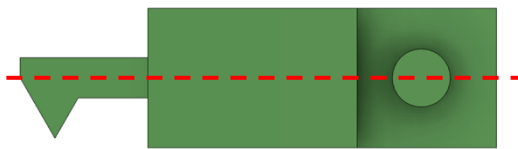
Updated Latch design showing parting line for simple injection moulding
